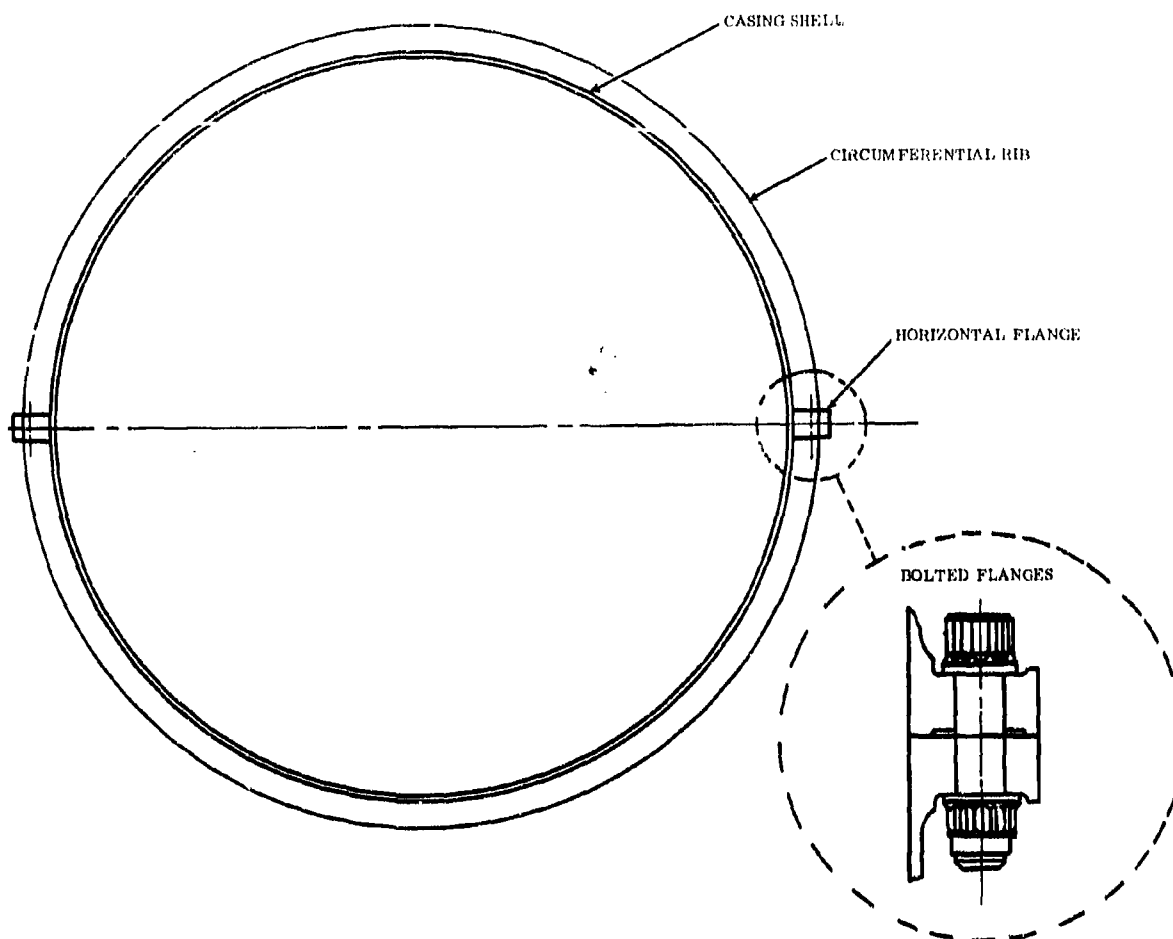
CASING CROSS-SECTION SHOWING SPLIT FEATURE FOR ROTOR AND STATOR INTERNAL REWORK
